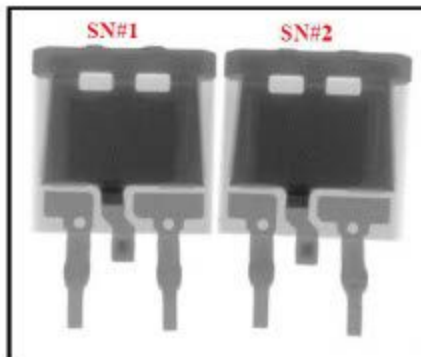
X-ray inspection of device package showing no obvious anomalies
